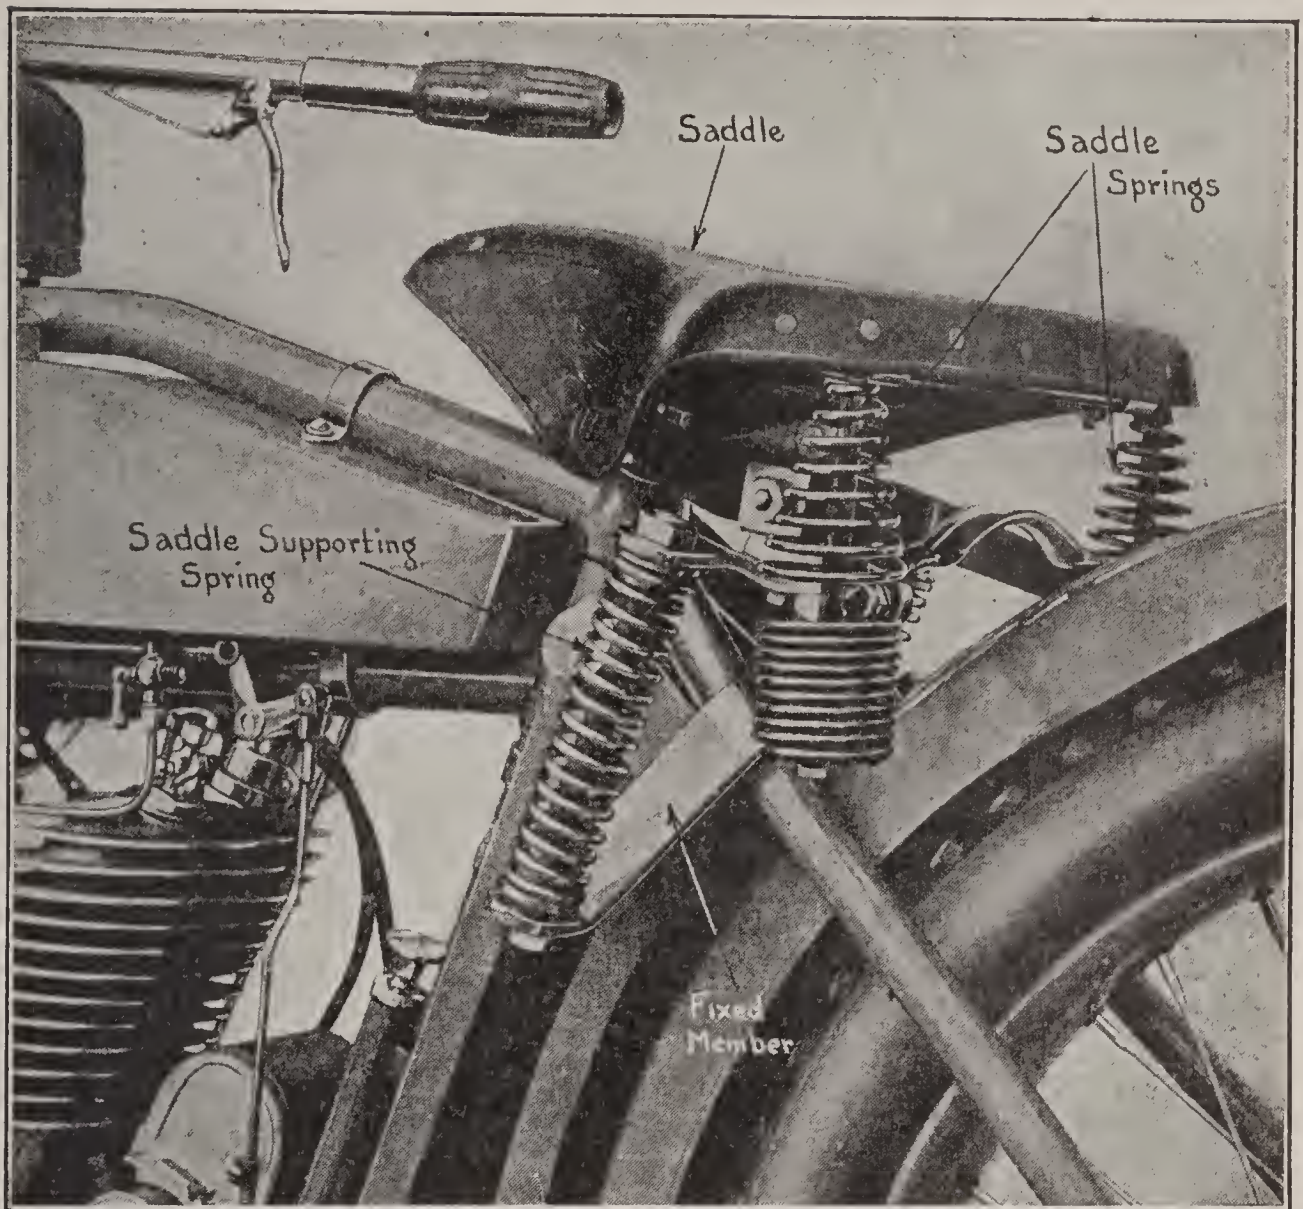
Double Coil Spring Supported Saddle Carrier of Yale Motorcycle.
